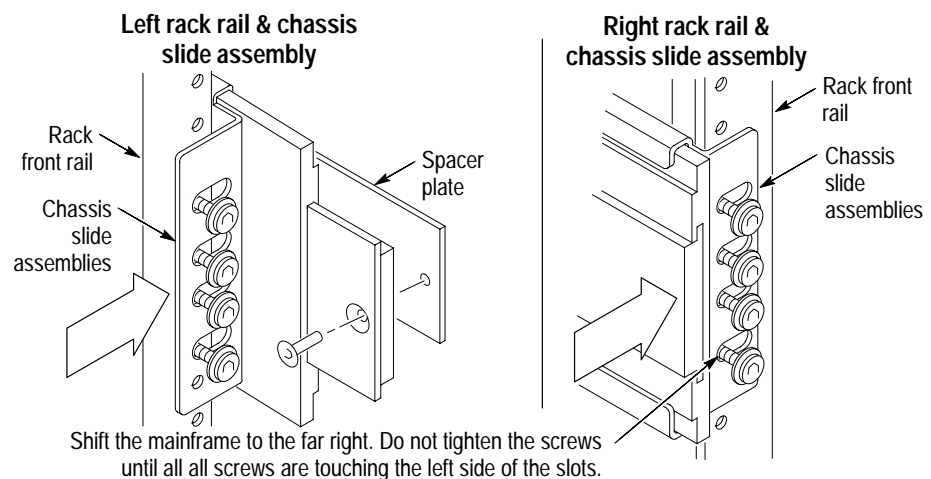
R1 or R2 rackmounting screw positions (front view).
